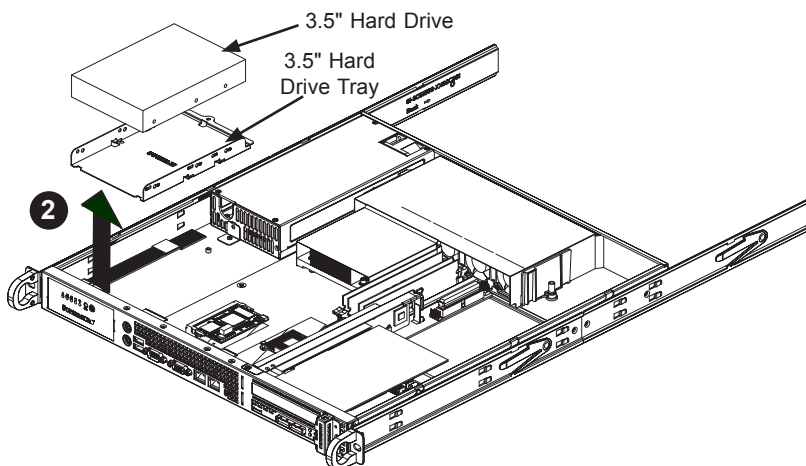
Removing a 3.5" Hard Drive and Tray
